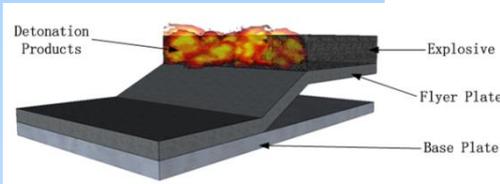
3D schematic diagram of explosive welding.
